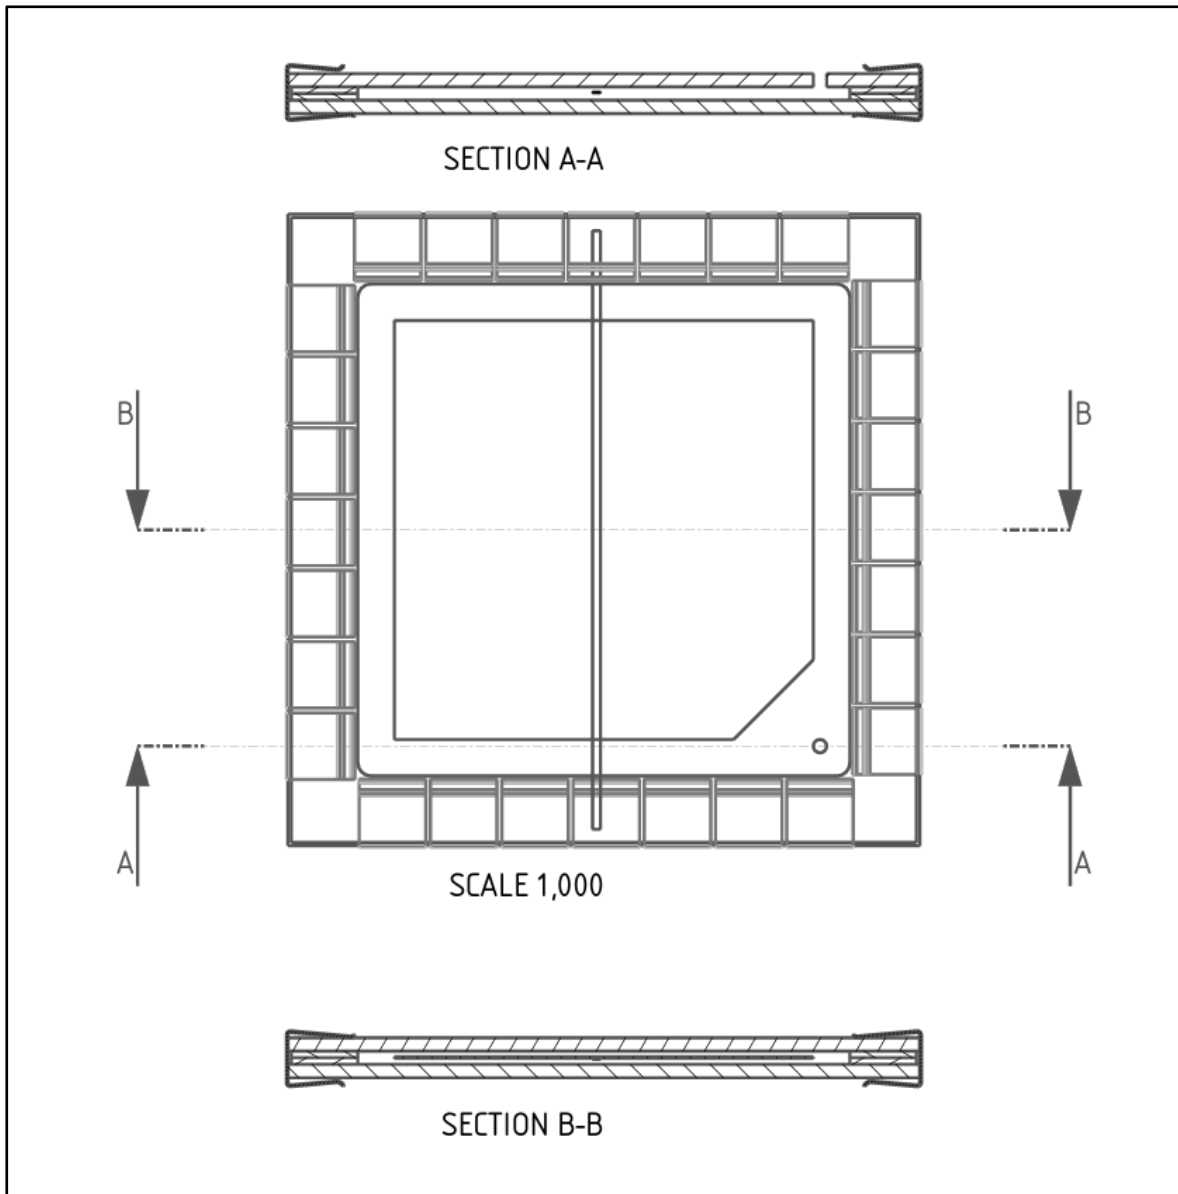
A top view of the steel spring version of Prototype B containing section views A-A and B-B. Section view A-A showcases the fill port while B-B shows the overall cutout view of the assembled module. This is the final version for the experimental setup.
